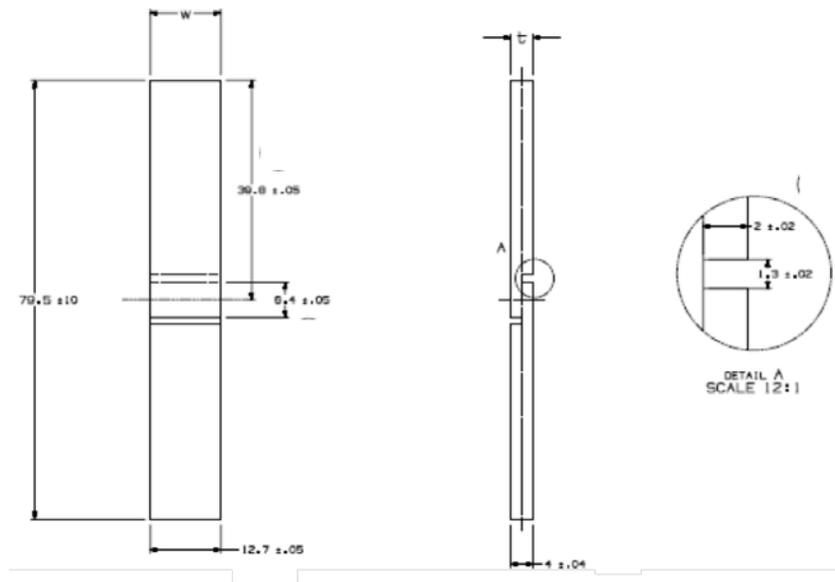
ASTM D-3846 lap shear test specimen (mm)
